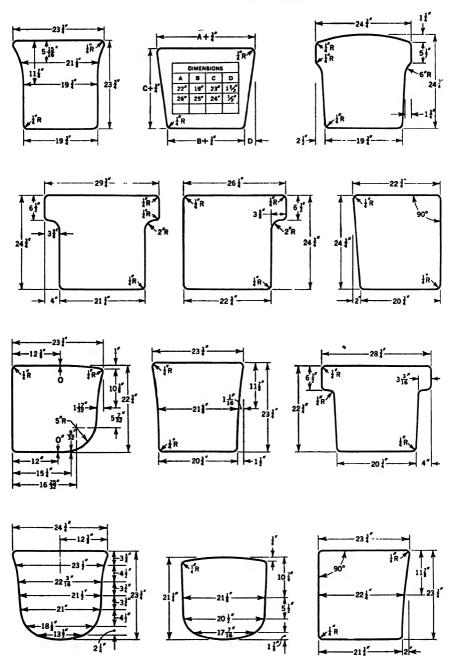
Shapes and dimensions of 12 molded sponge-rubber (latex-foam) cushions used in upholstering furniture.
